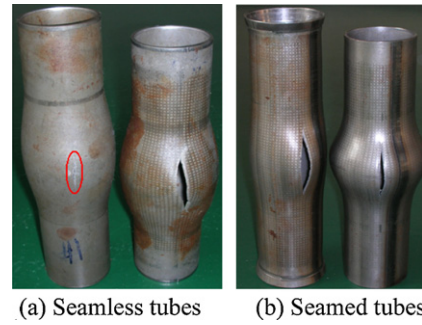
Cracking position for seamless and seamed tubes in hydroforming.
